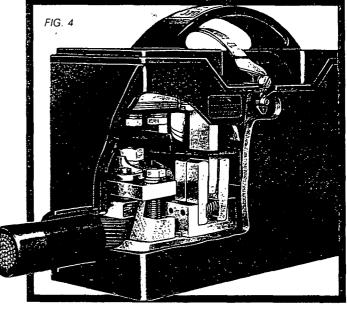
Front connected 400 amp RED SPOT fuse fitting with moulding partly cut-away to show silver-plated contact, red nylon shroud and cable clamping device.
